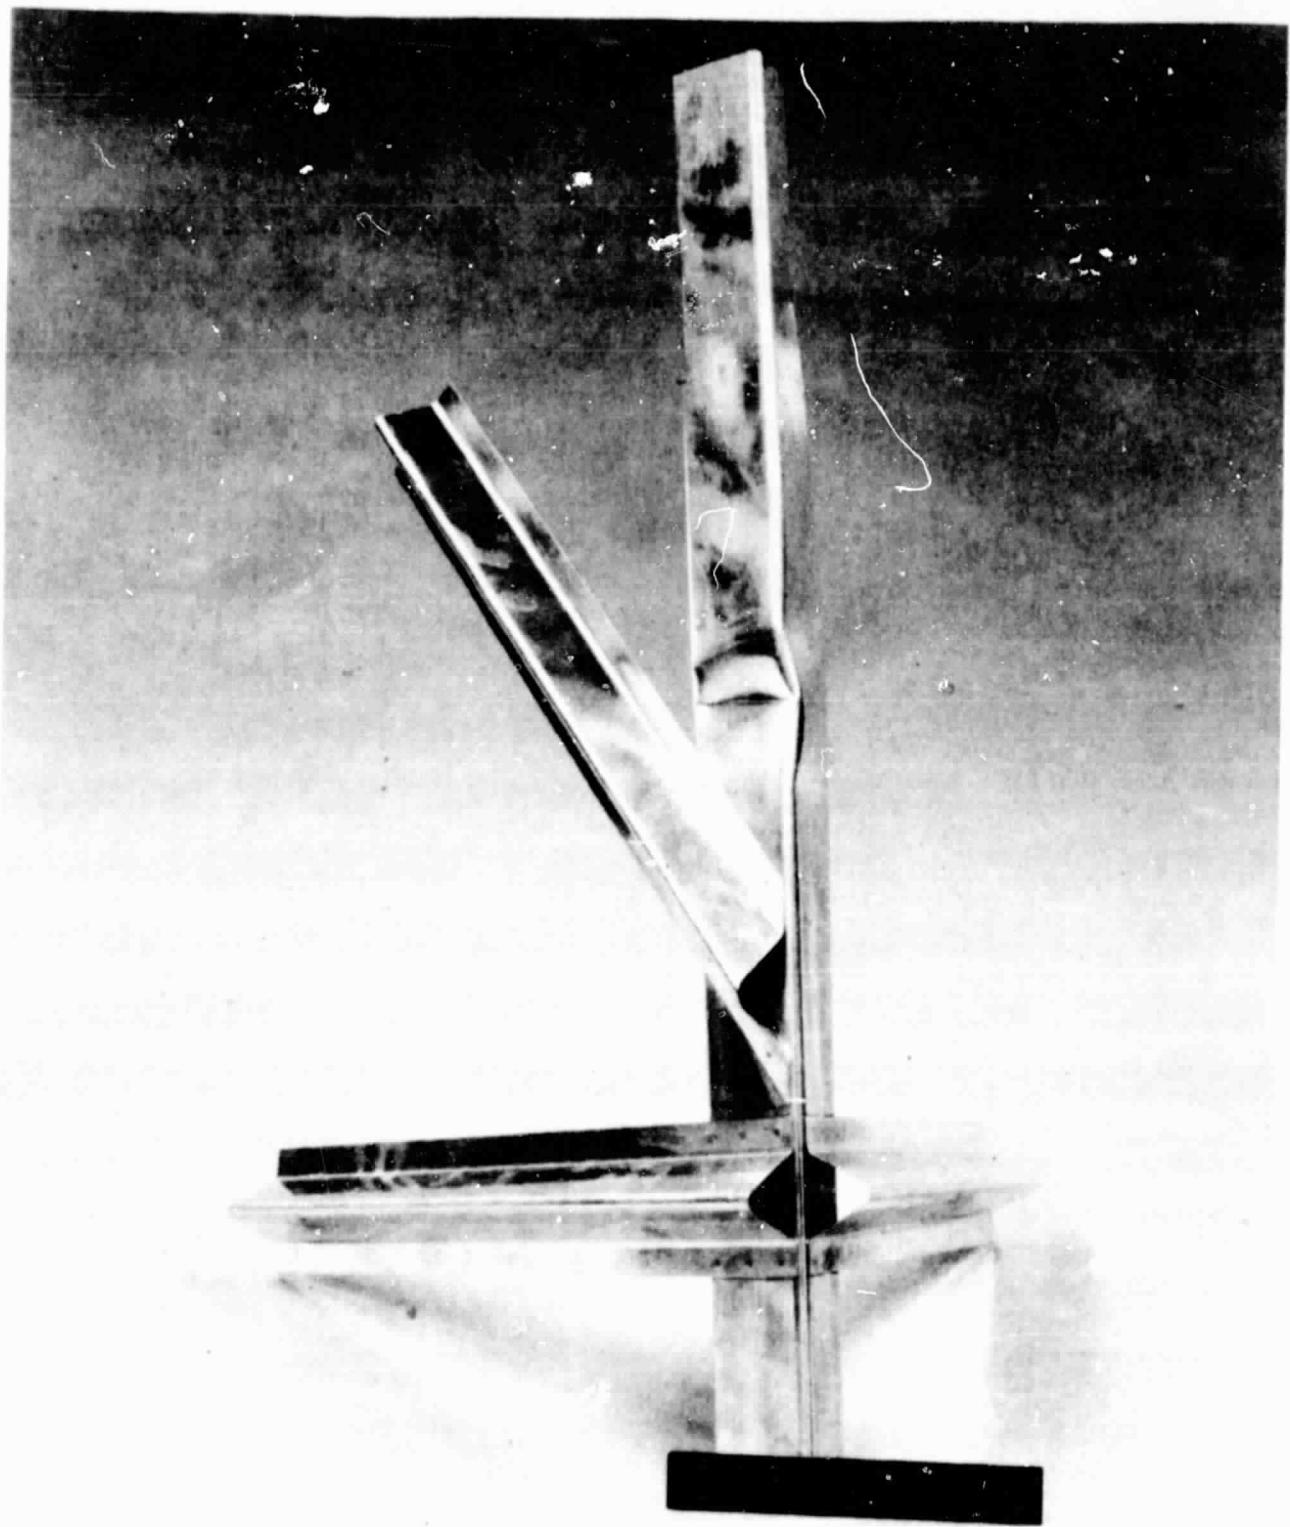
Six Weld/Joint Test Specimen
